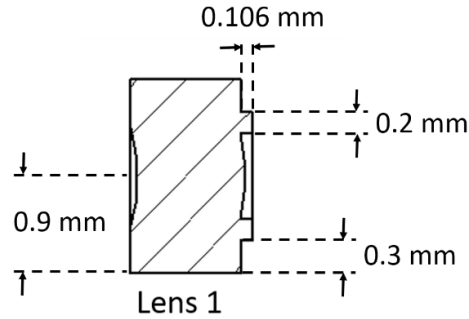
Detailed dimensions for the integrated mechanical mount on Lens 1.
